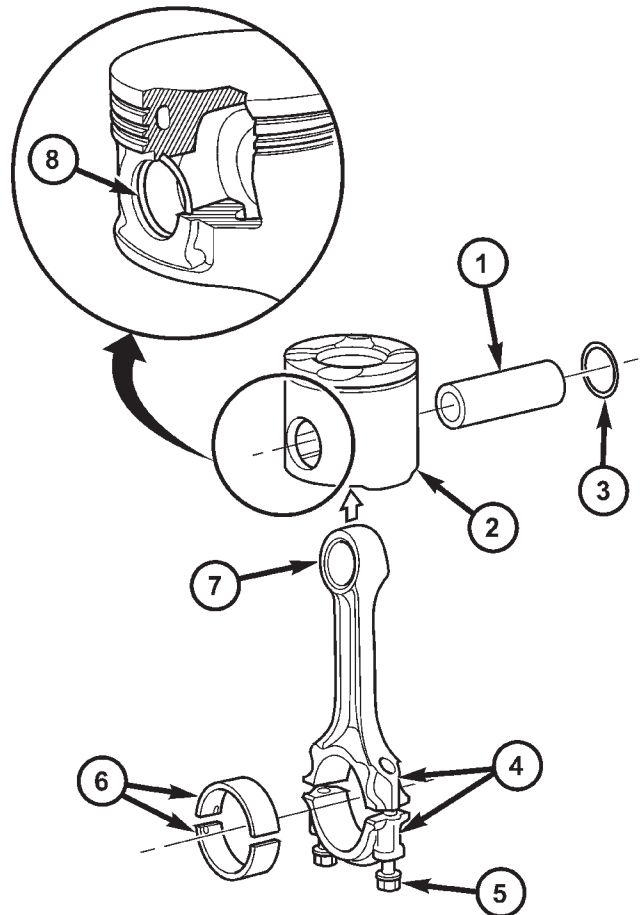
PISTON AND CONNECTING ROD ASSEMBLY
